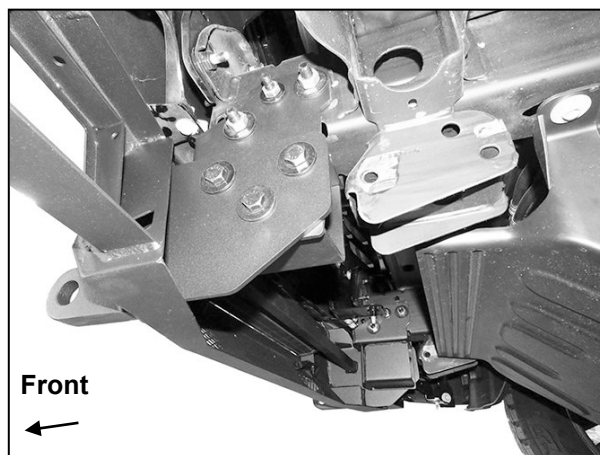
Insert Triple Nut Plates into back of Bumper Brackets. Driver/left side pictured
